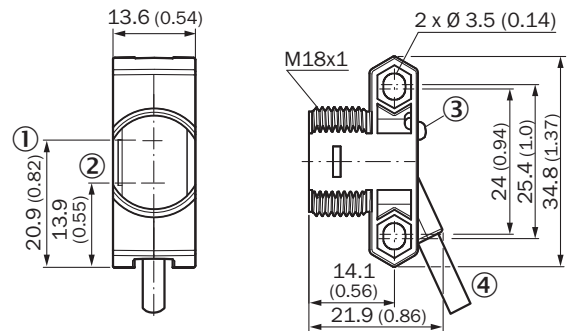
ZLx18-2xxxx / ZLx18-Bxxxx, cable
